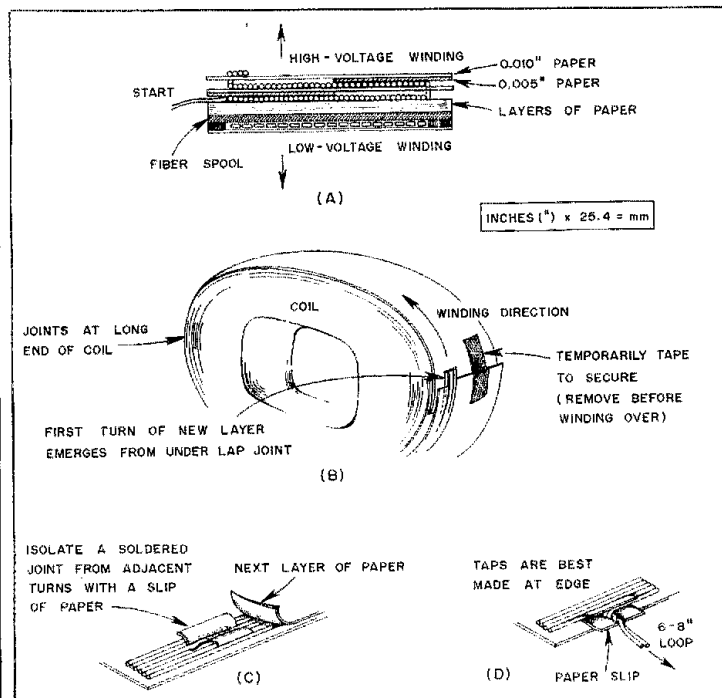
Details of the new winding. At A is a cross-sectional view of the winding. B shows how the insulating paper is installed. A soldered joint can be isolated as indicated in C. D illustrates the method of providing taps on the winding. Each layer takes about a half hour to install.
